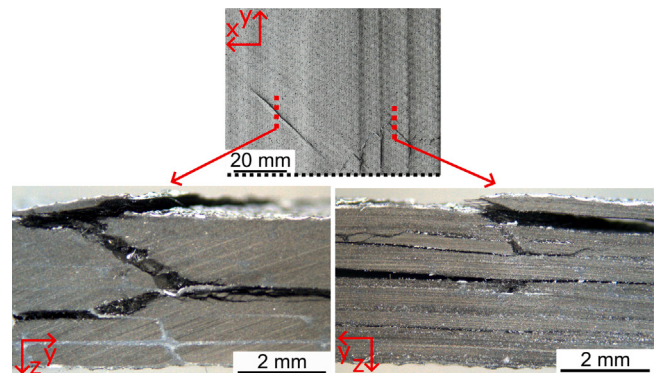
Cross-section views of the Taper45-600-5 specimen.
